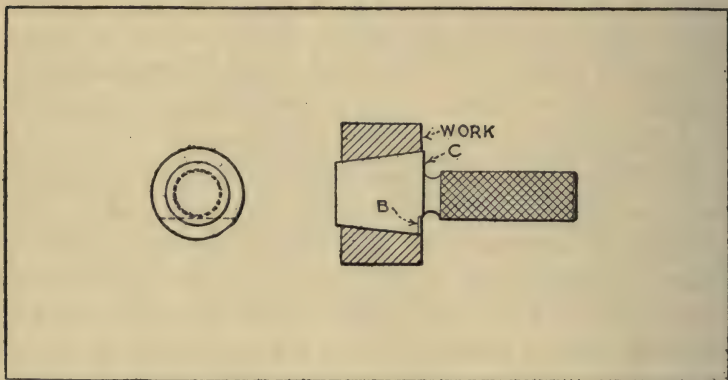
TAPER LIMIT GAUGE FOR INTERNAL TAPERED HOLE
